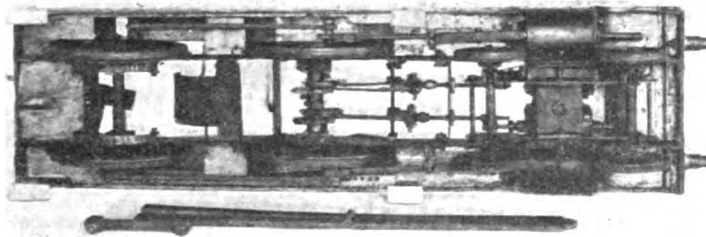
UNDERSIDE VIEW OF ENGINE.
